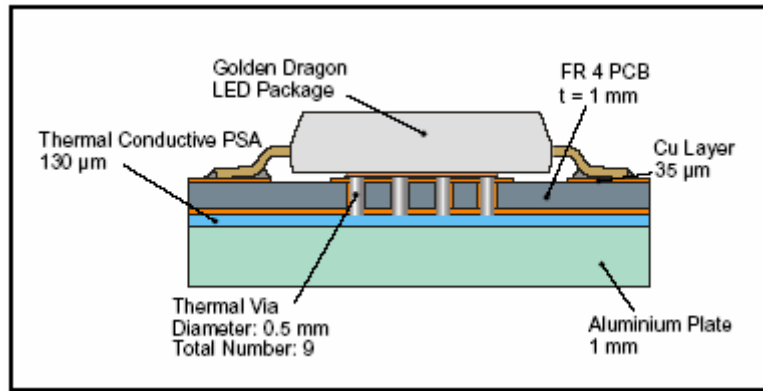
Dragon LED Mounted to an FR4 pcb With Thermal Vias
